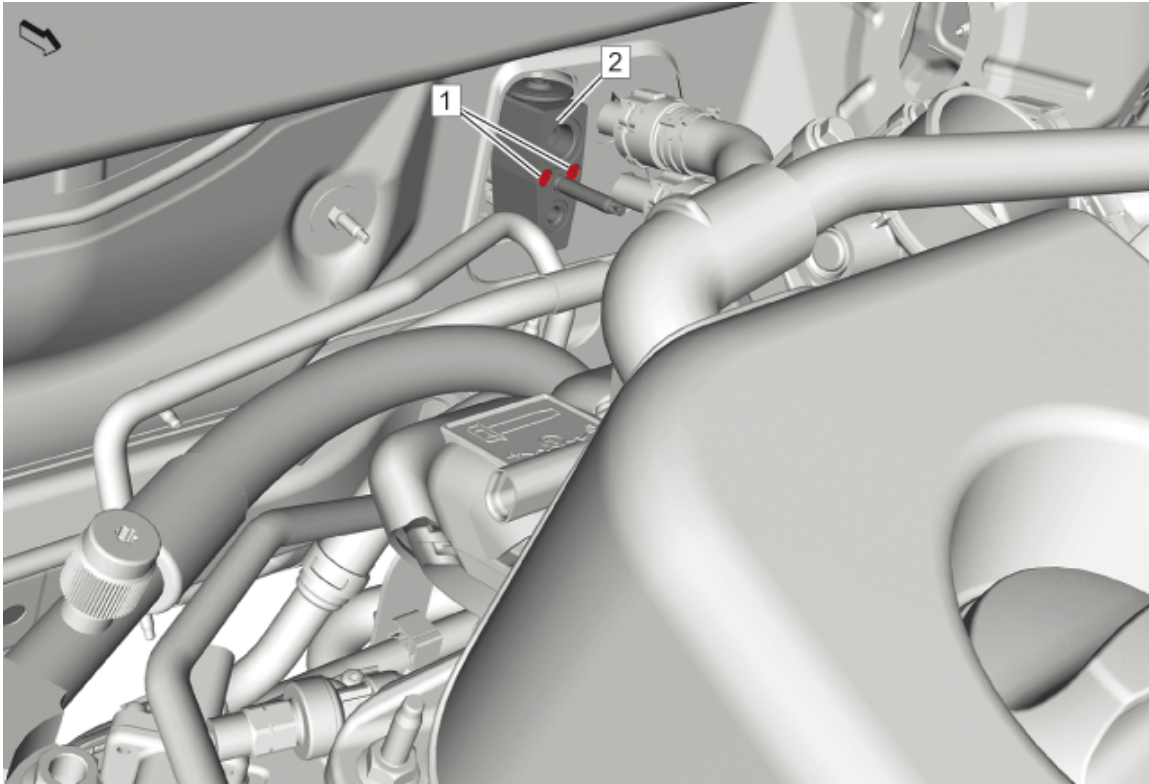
Air Conditioning Evaporator Thermal Expansion Valve
